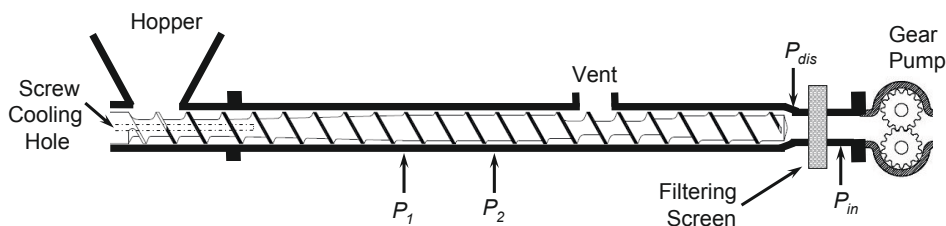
Schematic of the 203.2 mm diameter extrusion process for HIPS resin
